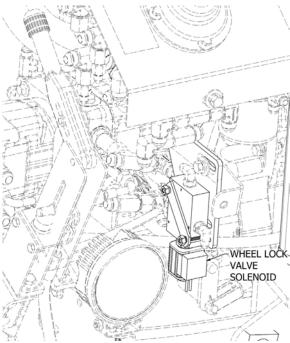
Wheel Lock Valve Solenoid, Earlier Models
